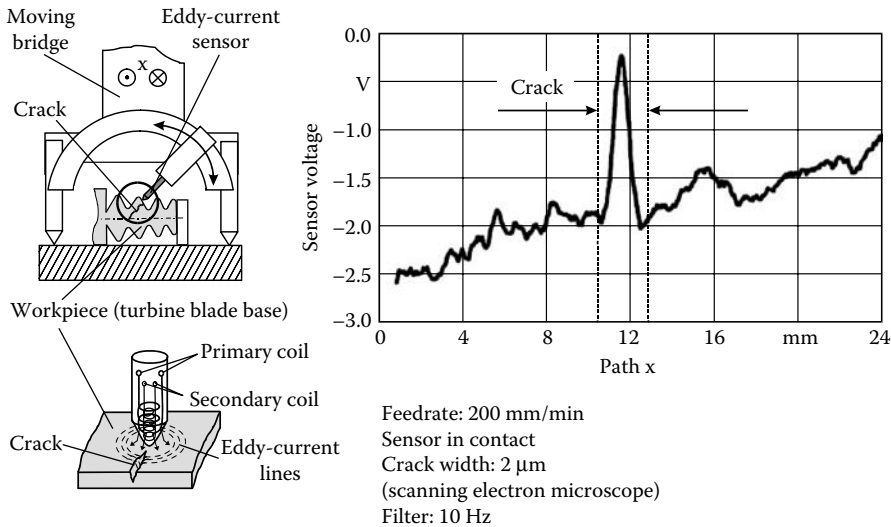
Eddy-current crack detection after surface grinding of turbine blades.
